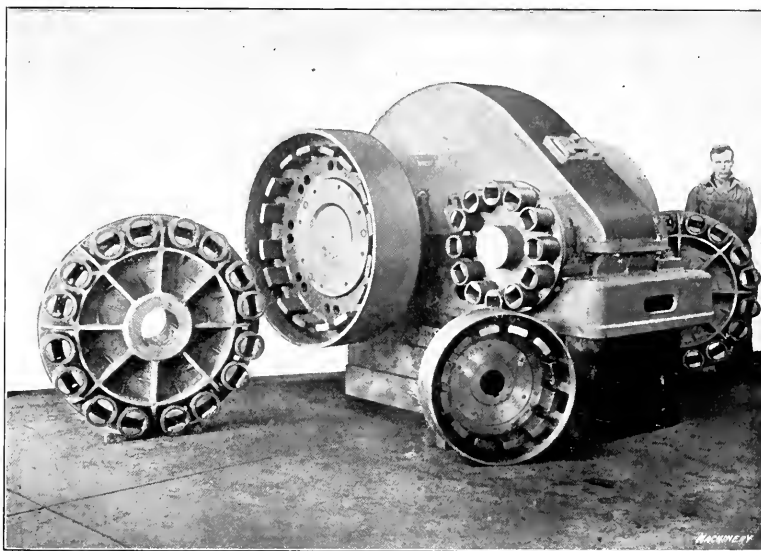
Enclosed Herringbone Gears for Rubber Mill. Illustration shows also Flexible Couplings used in connection with Rubber Mills
